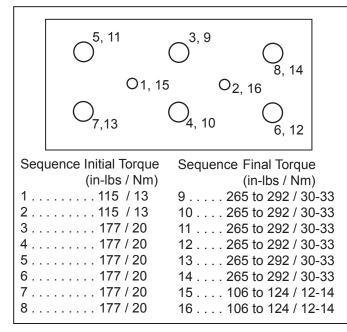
Bendix[®] BA-922[®] Compressor Head Bolt Torque Sequence
